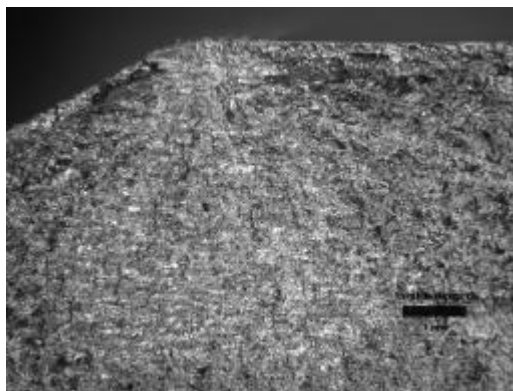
Fracture face showing typical corner failure for LPB specimen.
